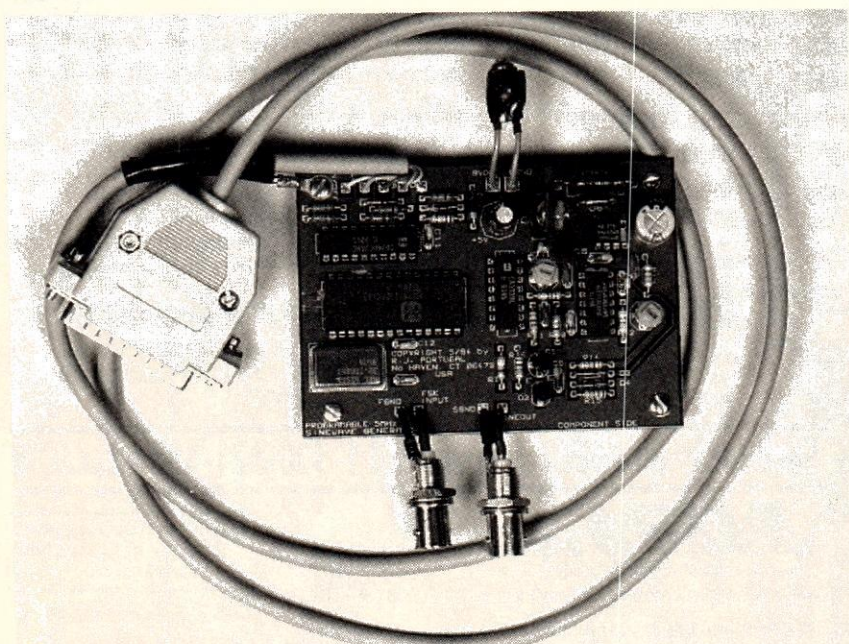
AN EARLY PSG PROTOTYPE. This board differs slightly in its parts layout from the final design.
